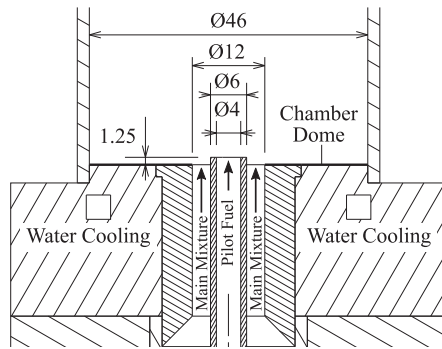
Detailed view of the injection system with the main dimensions are in millimeters.
